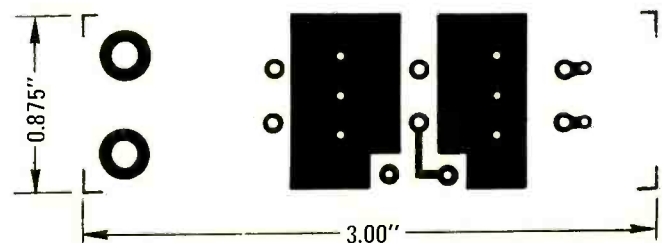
FOIL PATTERN of bottom of double-sided switch PC board shown actual size.
